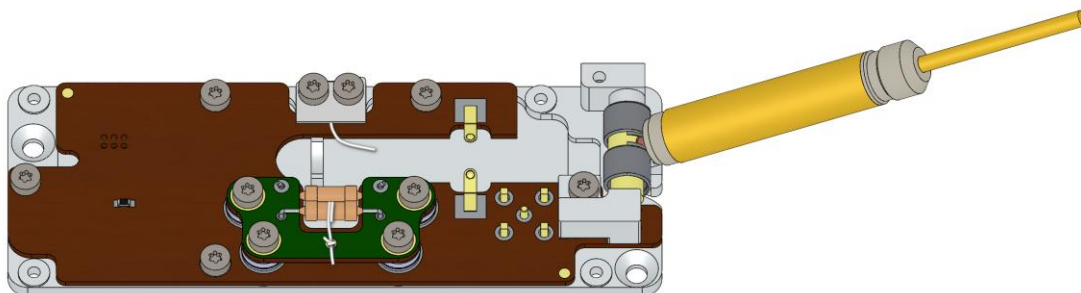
AM2150-O MK2 3DCAD Deployed
